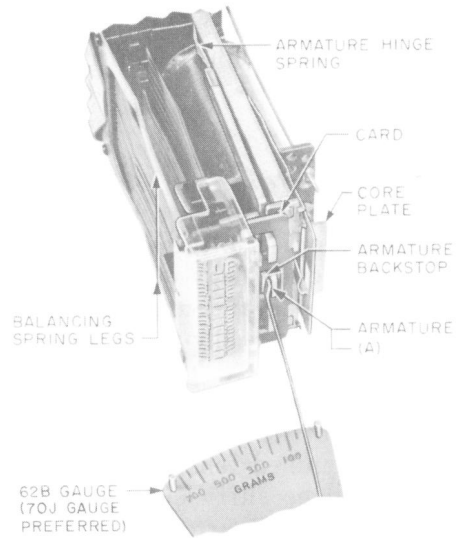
Method of Checking Armature Back Tension for AL Type Relay
